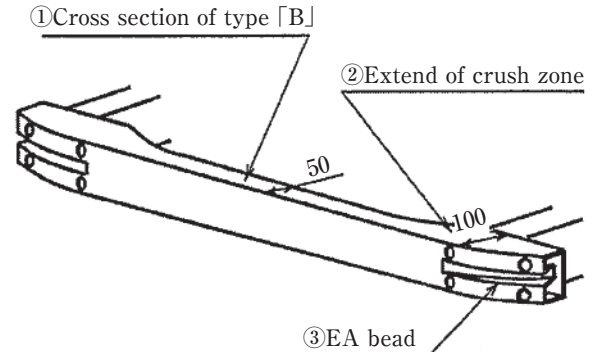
Aluminum bumper reinforcement with a cross section change.
